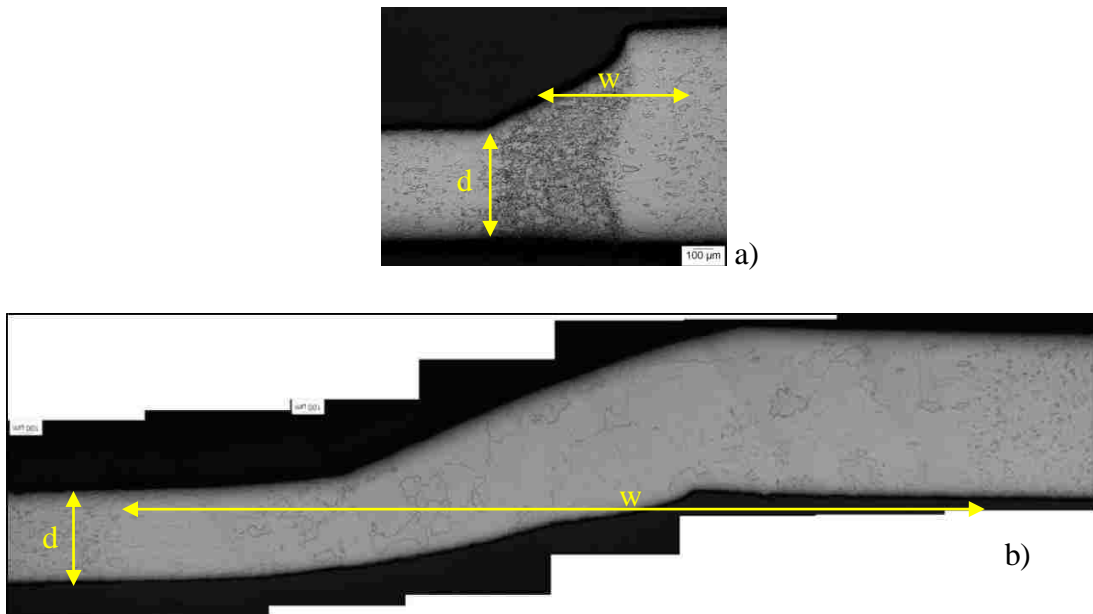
Weld cross-section a) both laser and b) TIG welding
